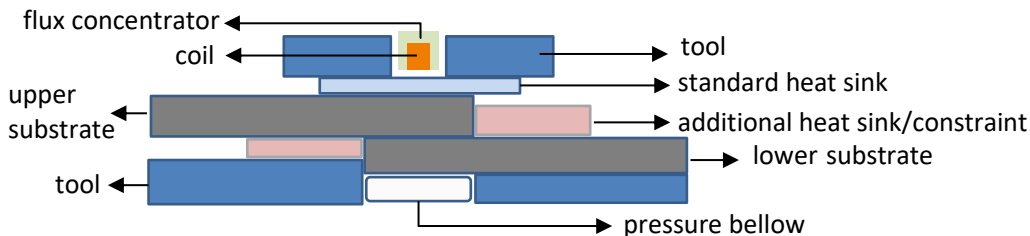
Schematic illustration of the cross-section of the induction welding tool including standard as well as additional components (such as flux concentrator and heat sinks at the sides of the substrates).
